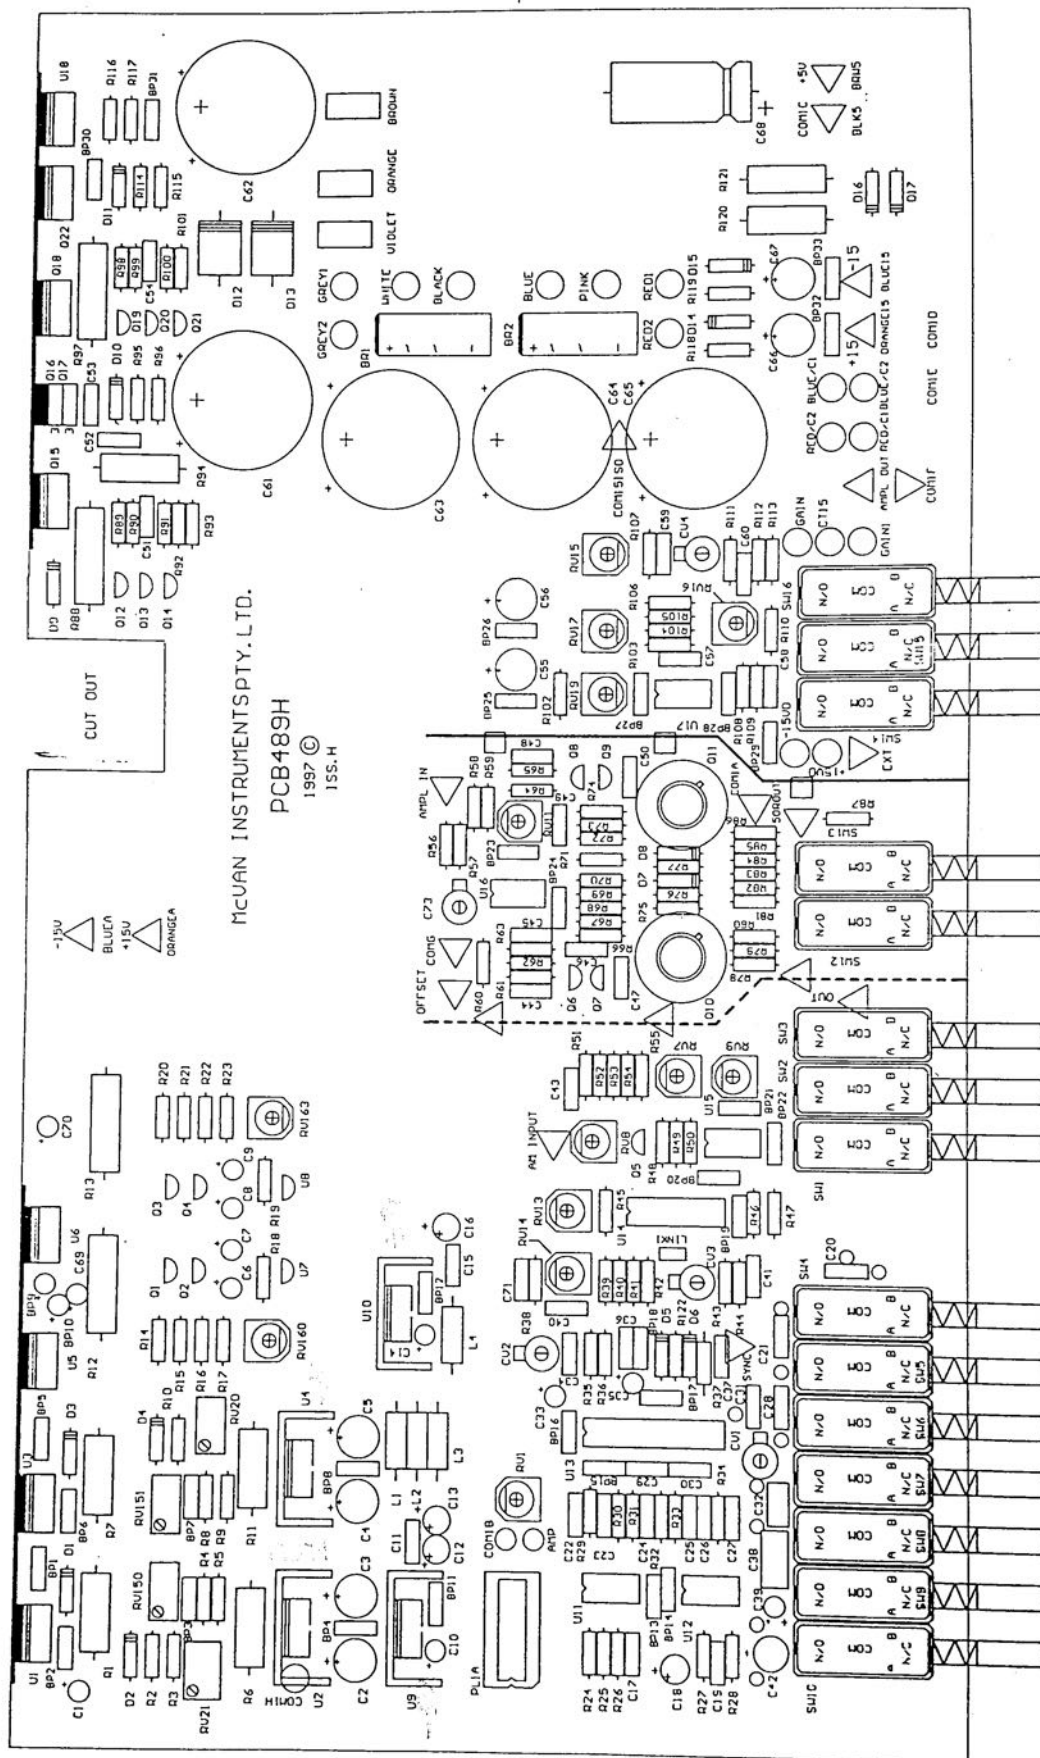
PCB489 Main PCB Layout showing Component Designations.
